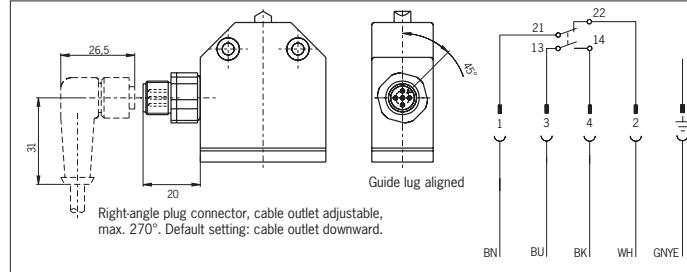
Dimension drawing/connection diagram for SN01.558SVM5 with plug connector M12 (SVM5, 5-pin)
